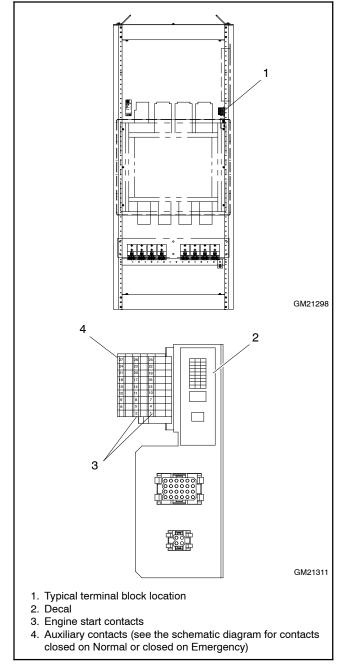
Engine Start and Auxiliary Contact Terminal Block, 230–4000 Amp Transfer Switches
